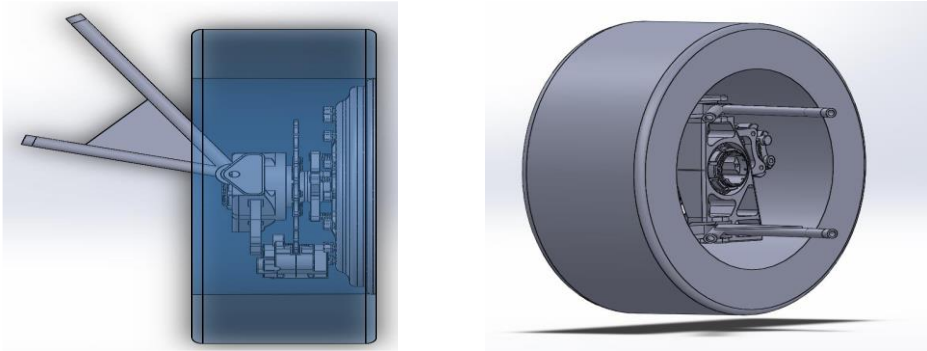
Installation of rear upright with upper and lower a-arm in rear wheel assembly and Upright successfully connected to upper a-arm in rear wheel assembly (swept forward 60 degrees).
